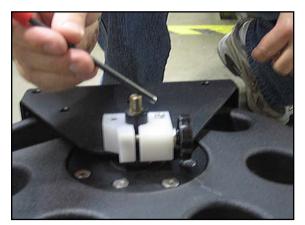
Remove Screws from Both Sides of 1st Hose Reel
